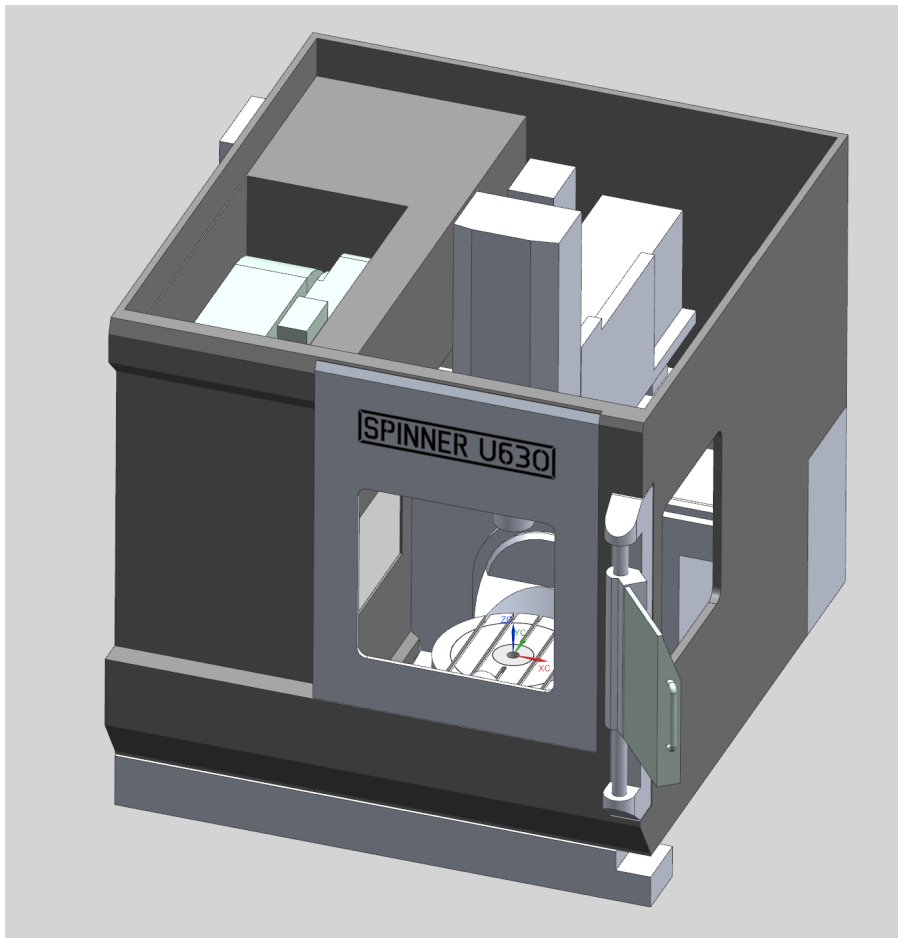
Simplified CAD data of the SPINNER U5-630 machine tool
